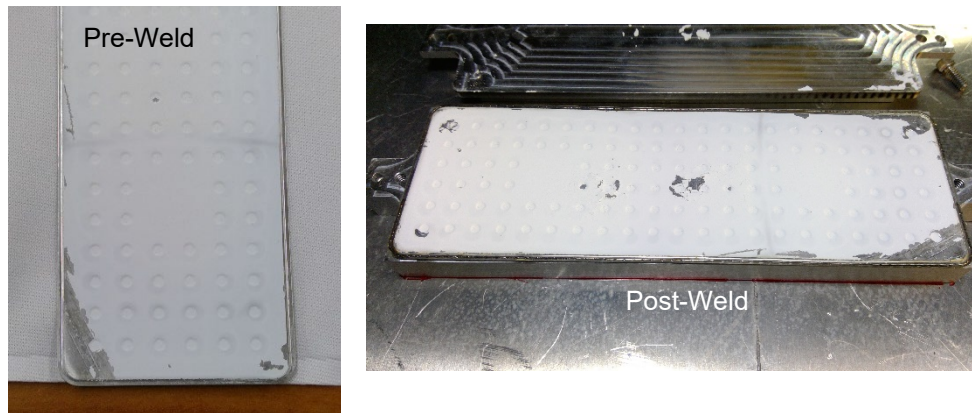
Views of Sample Pre-Weld (left) and Post-Weld (right)
